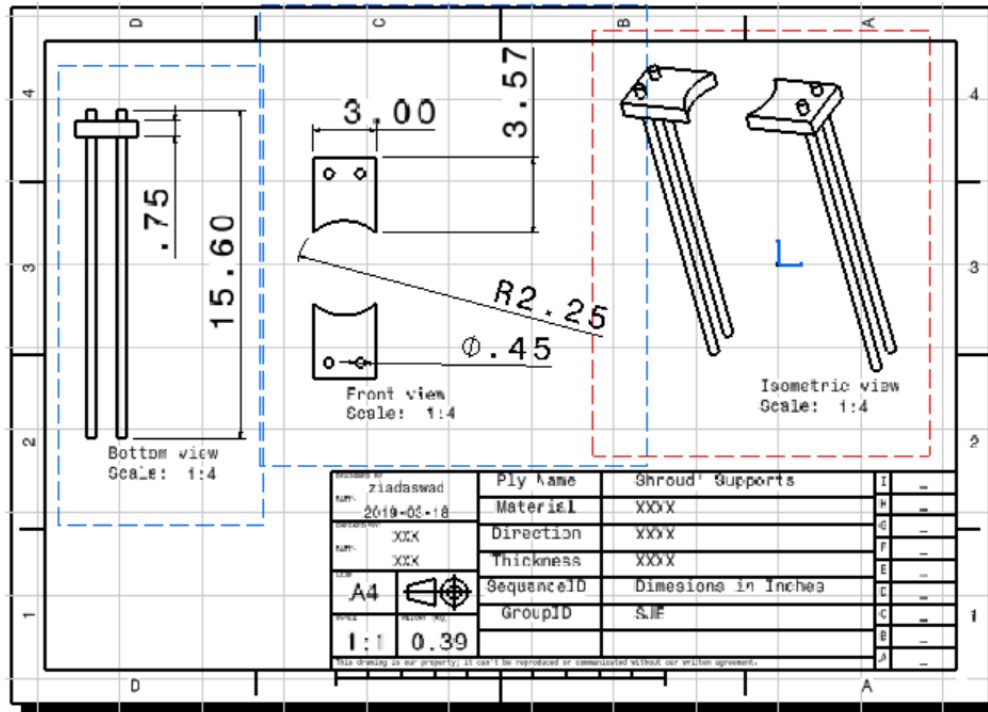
The Shroud Supports CAD Drawing (Acrylic Pieces and Threaded Rod)
